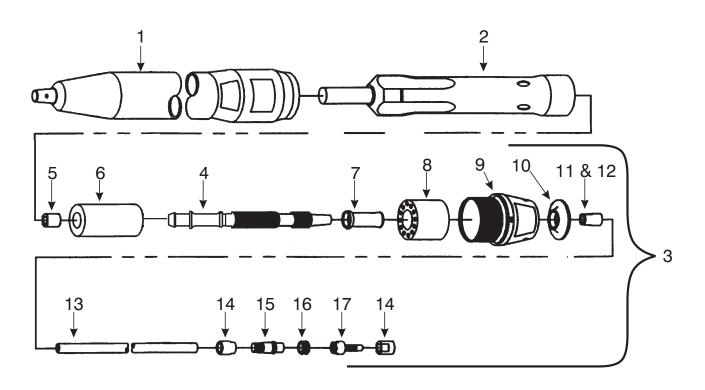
Model 4001 Hole-Hog Complete Assembly
